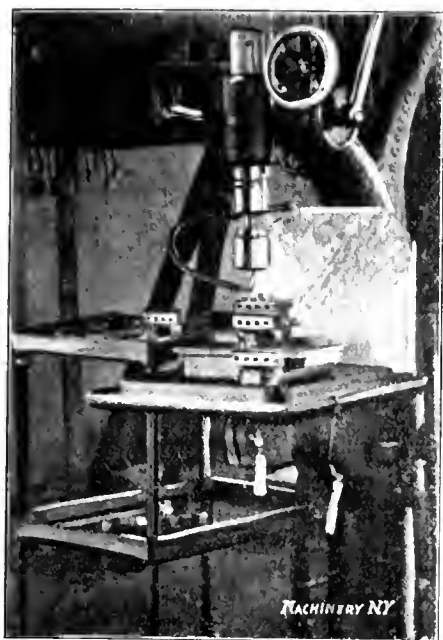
Drilling Set-screw Holes in the Gang Tool-holders
